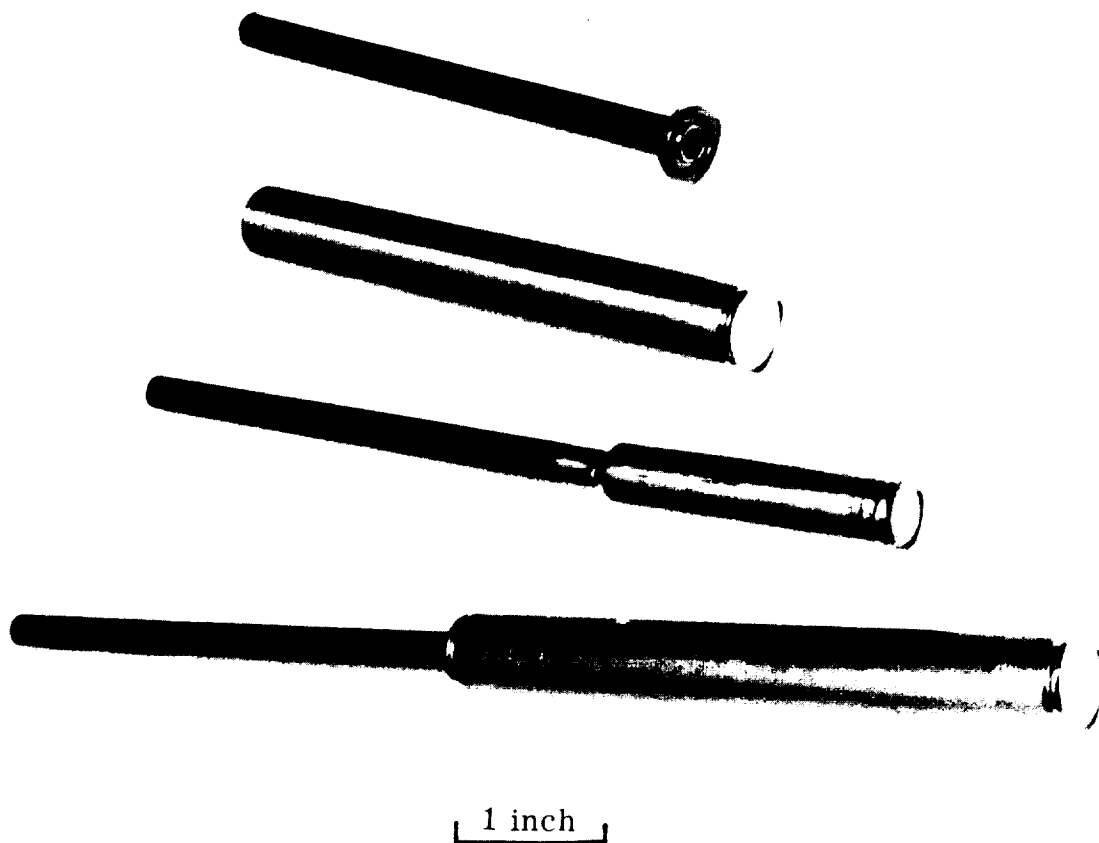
Photograph of Welded Cb-1Zr Purity Test and Corrosion Test Capsules (Bottom) and Sub-assemblies (Top).
